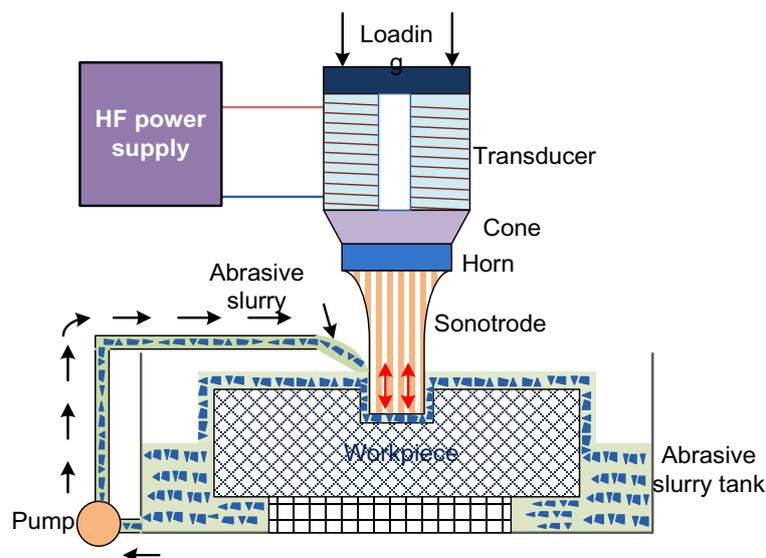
Schematic showing ultrasonic machining system with various components.
